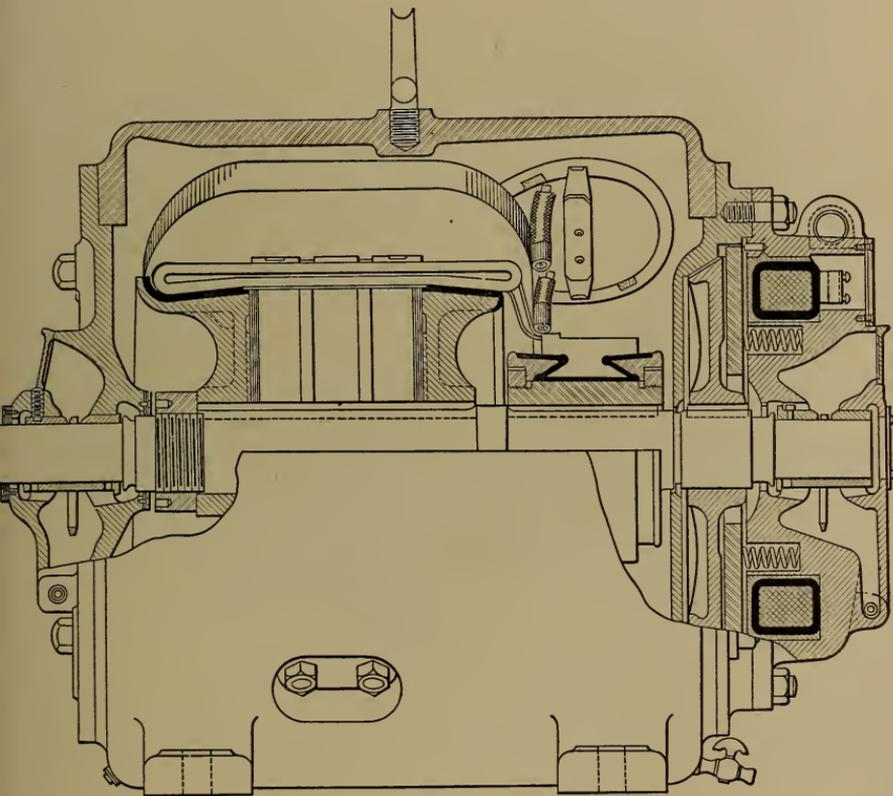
Assembly of CB-27 Motor with EC-104 Brake.
